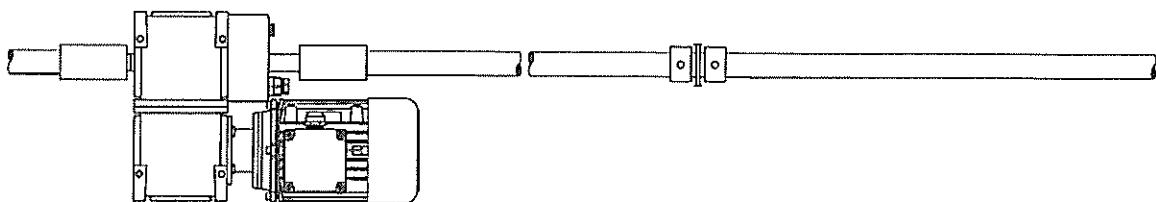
Stop rings at bearing to prevent axial travelling.
